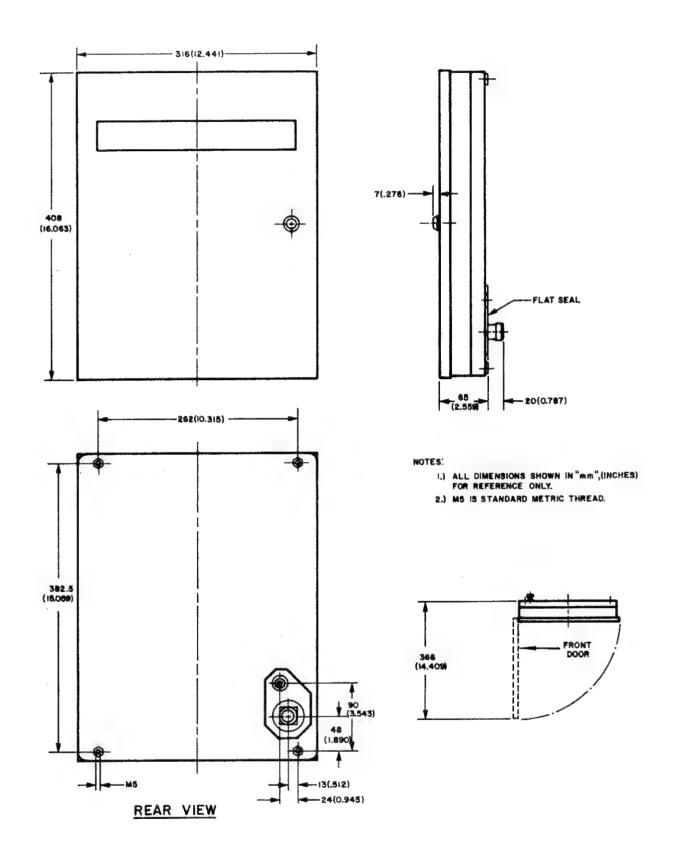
TAM 2.01 (Fixed TAM) Outline Drawing
